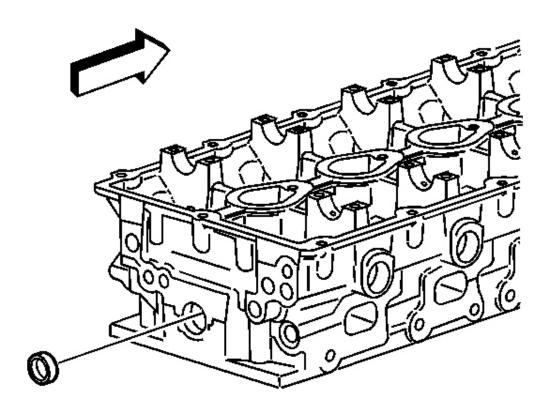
View Of Water Jacket Plug Courtesy of GENERAL MOTORS CORP.
